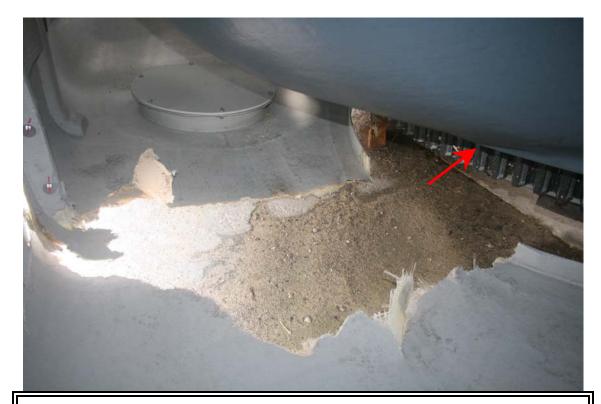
Fractured left front bottom of nacelle. Viewed to the front below the catwalk. Yaw gear at arrow.
